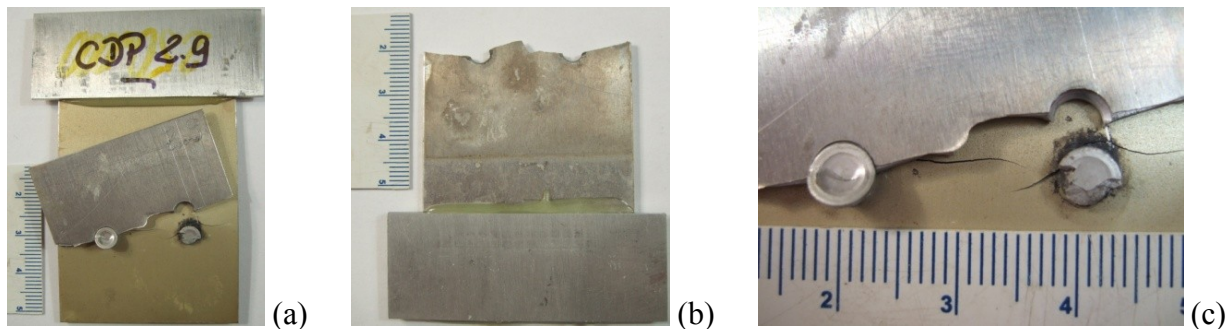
(a) Overall view of Al-GI riveted joint (F); (b) Inner face of countersunk Al-alloy sheet; (c) Detailed view of rivet heads, fracture of Al-sheet, and Glare sheet cracking.
